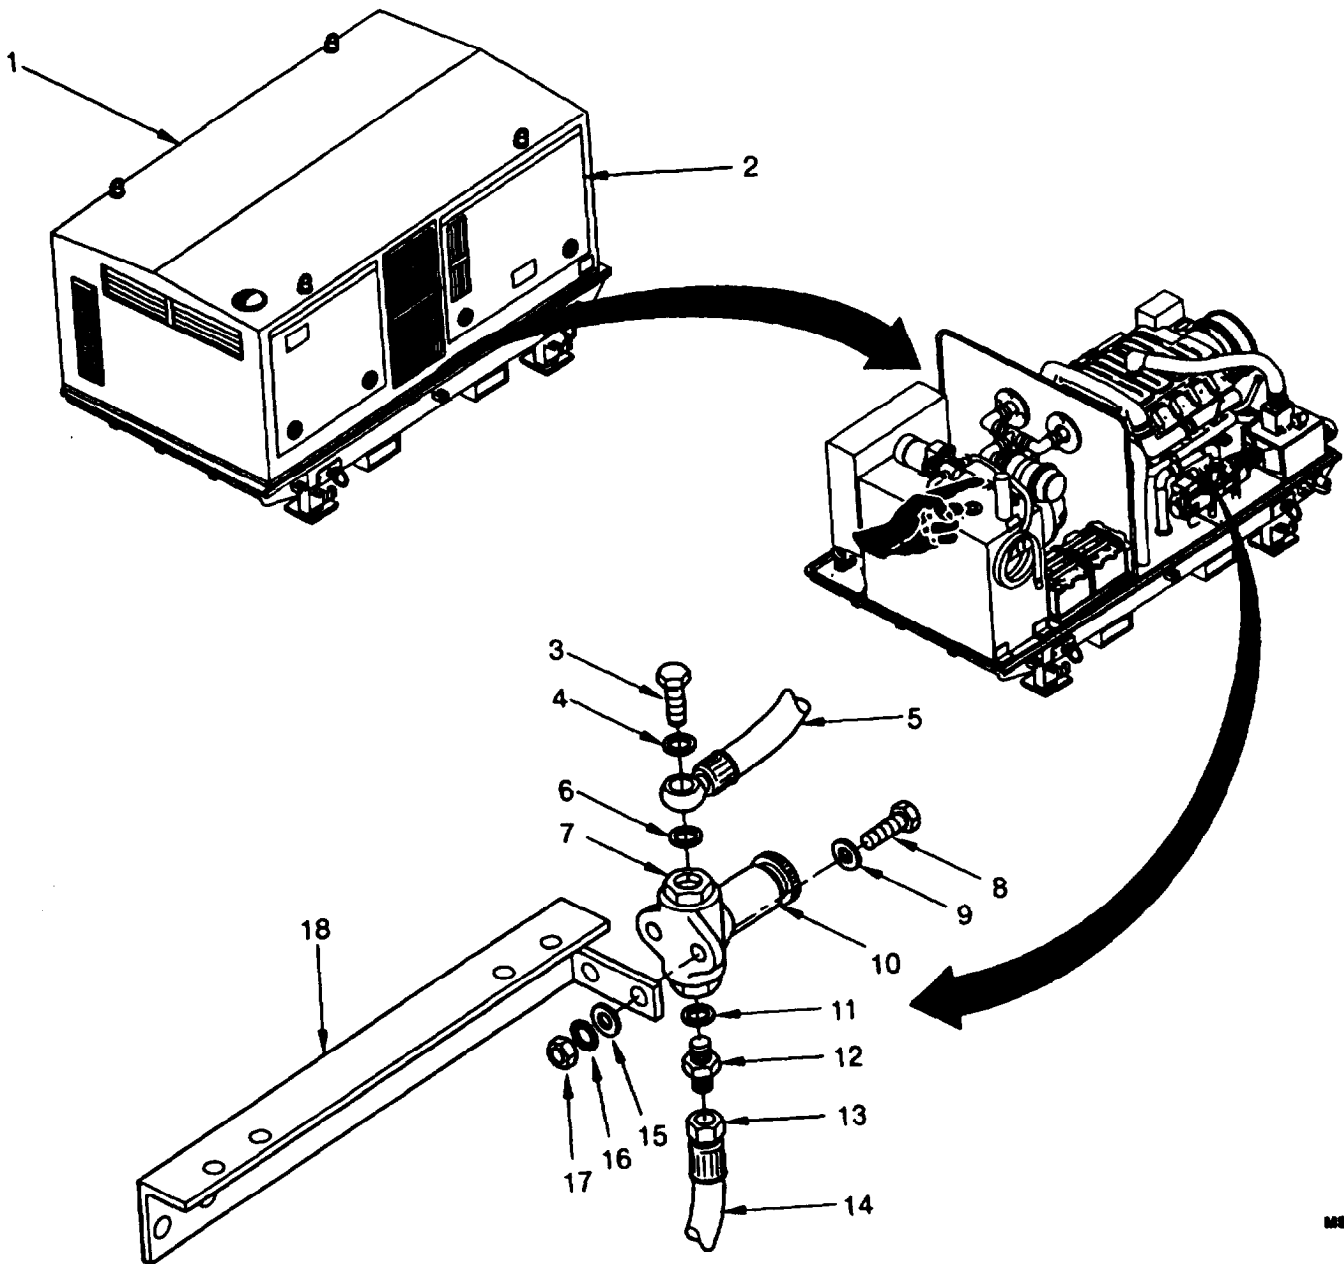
Diesel Engine Cylinder Cooling Fins and Oil Cooler Maintenance.
